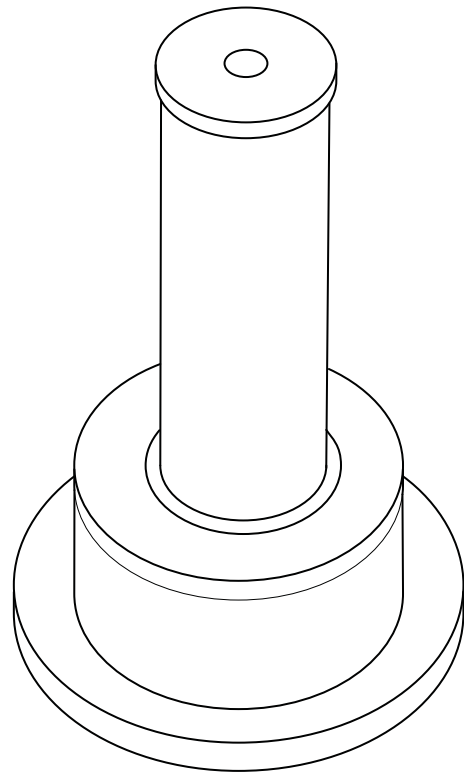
Oil Seal Pressing Tool (332/Y4033)
